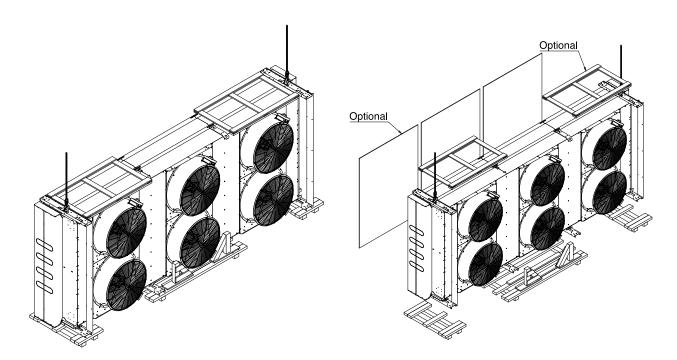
Upper part fastening protection (left) and hardboard coil protection (right)
